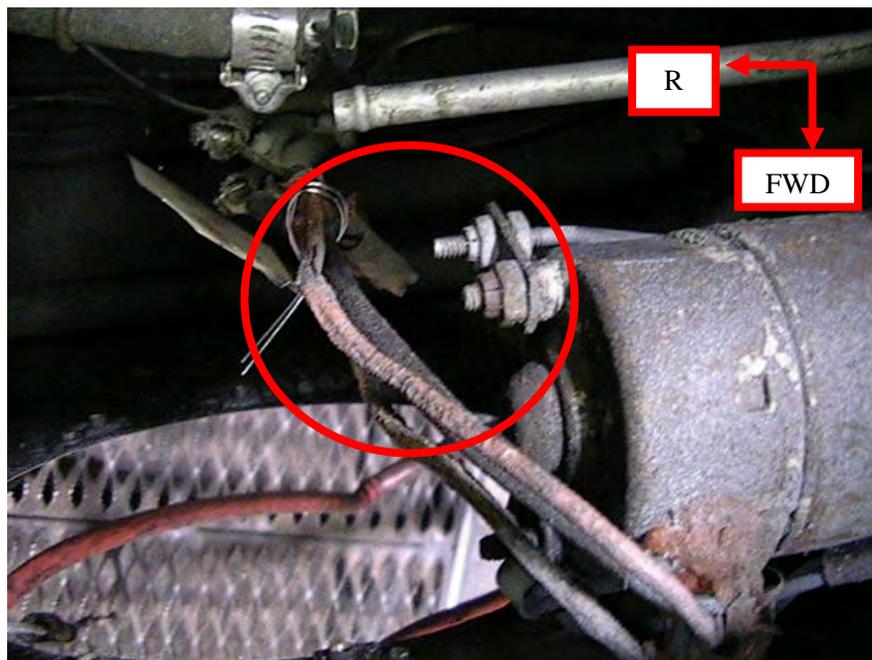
Chemically Damaged Cowl Flap Motor Wires FS 110, WL 0, and LWS 77
